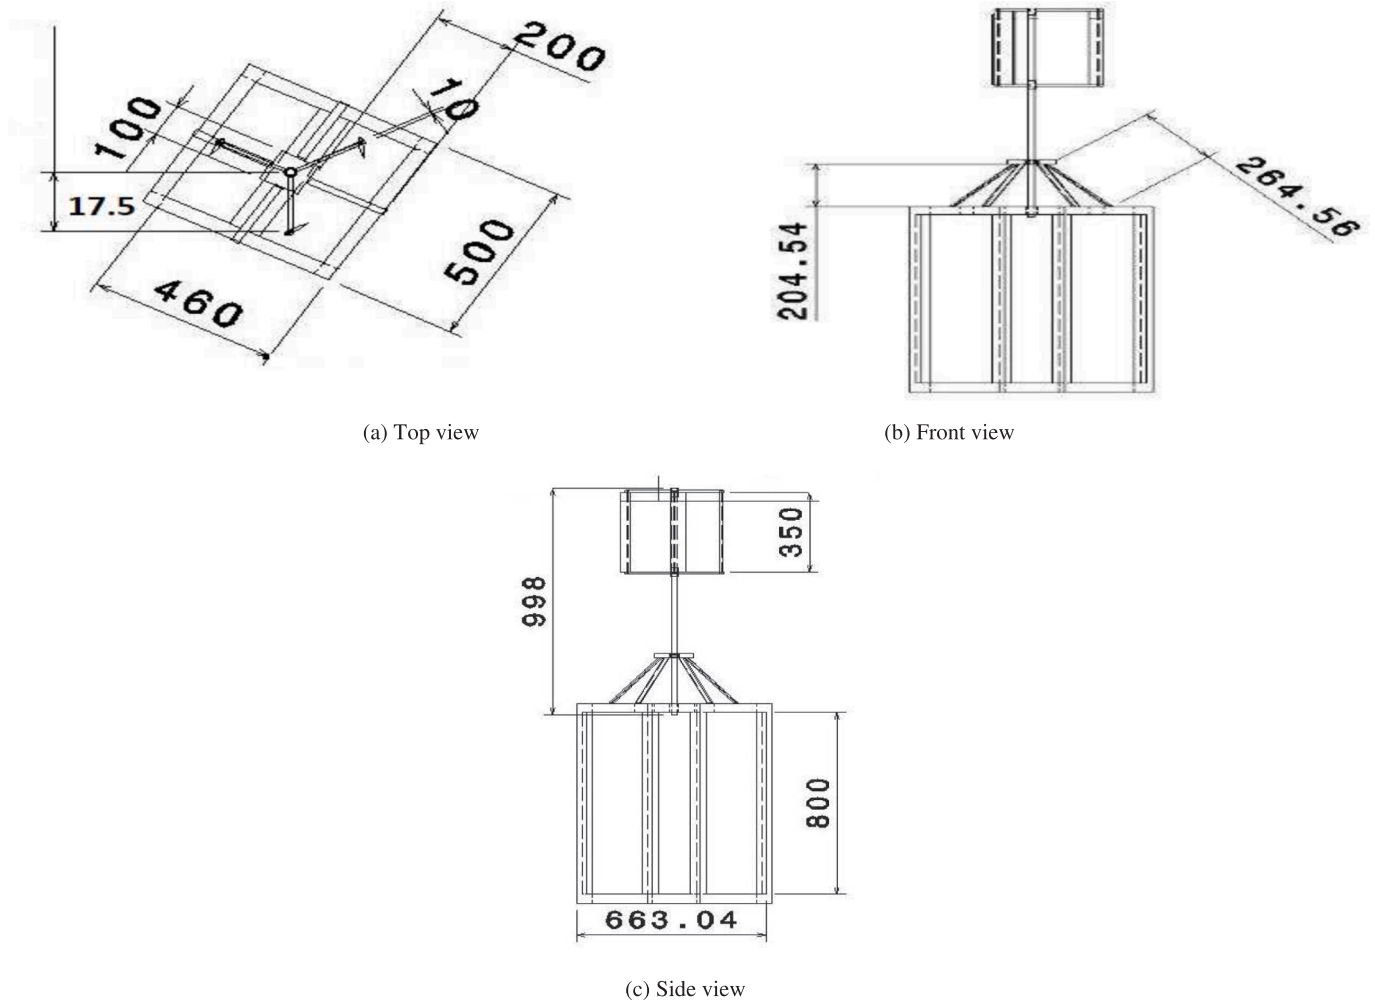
Rotor shape (drawing computer-aided design (CAD)) with three views: (a) Top view, (b) Front view, and (c) Side view.
